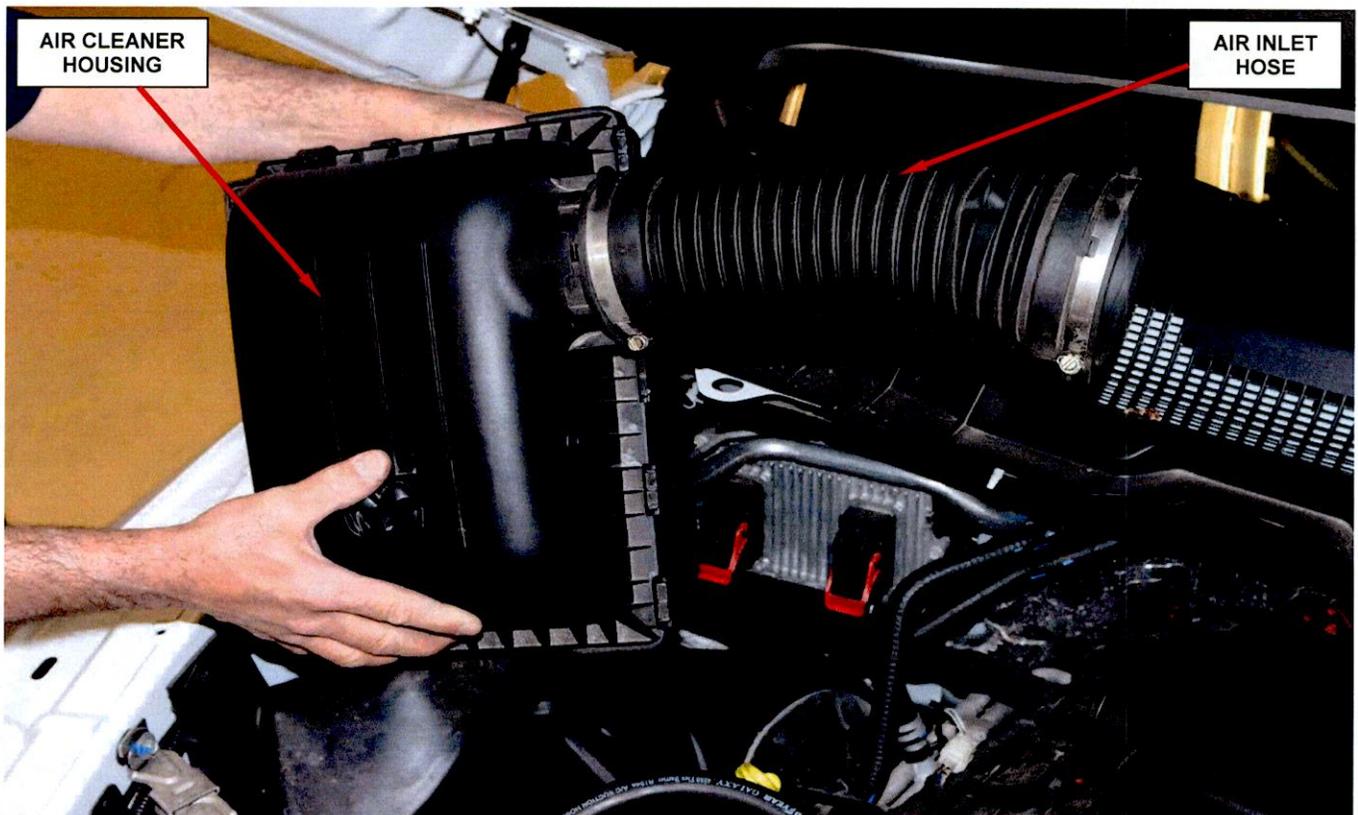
Air Cleaner Housing and Air Inlet Tube
